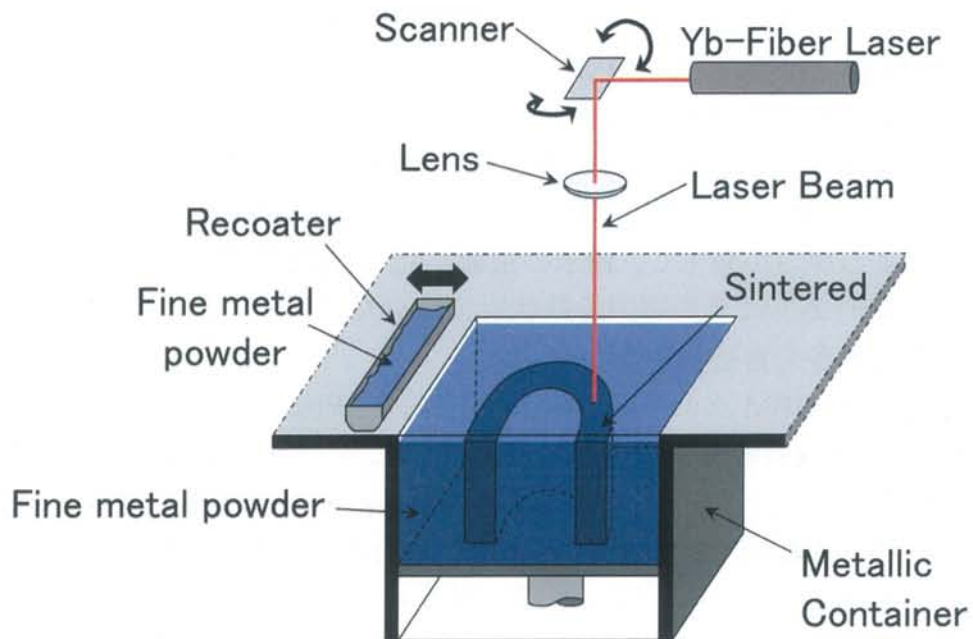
Schematic diagram of selective laser melting (SLM) machine.
